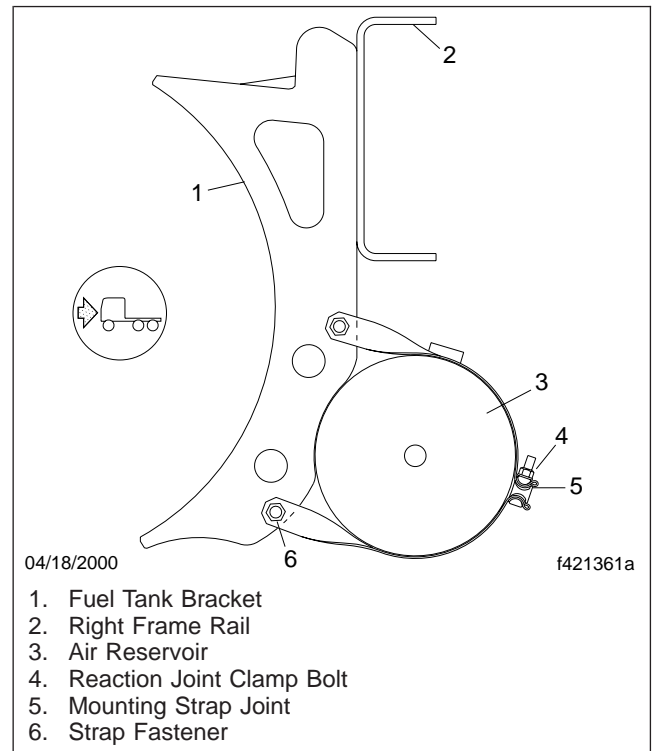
, Air Reservoir, Fuel Tank Bracket Mounting
